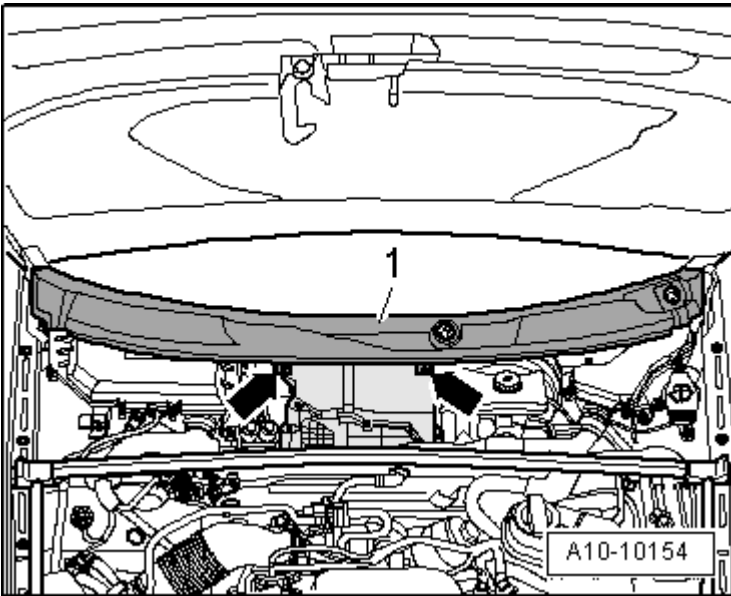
Removing Rubber Seal For Plenum Chamber Cover & Plenum Chamber Cover
